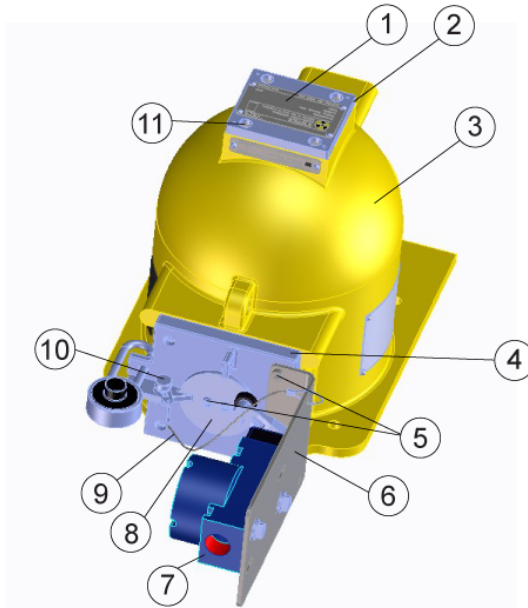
SHLD2 Source Holder - Explosion Proof with Limit Switch
